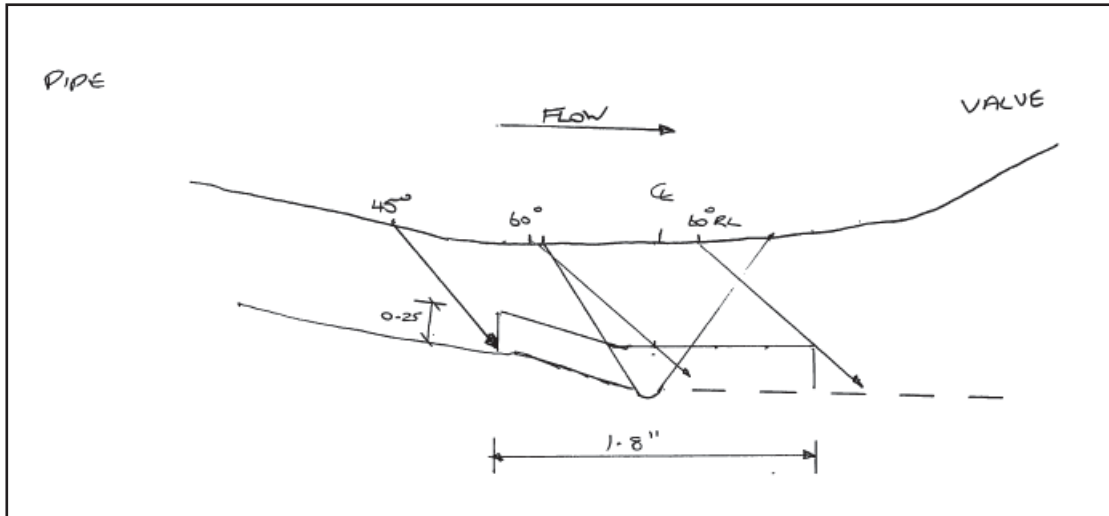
Weld SIF-D087-21, Weld Profile Axial Scan
